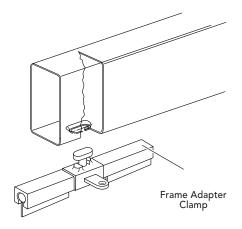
Adapter Clamp for Conventional Anchoring System
